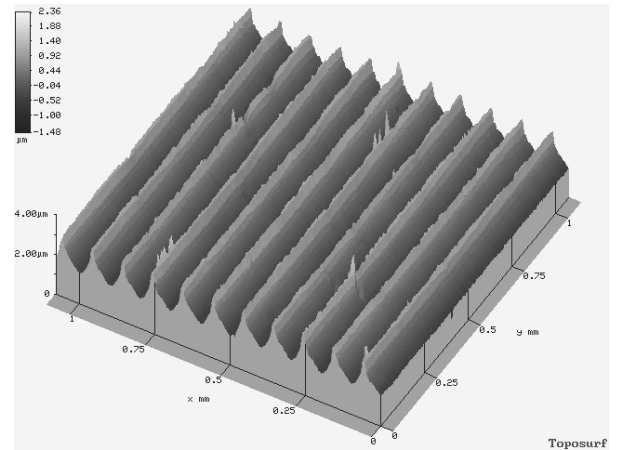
Isometric view of surface machined with CBN tools HT1, Sra = 0.35μm
